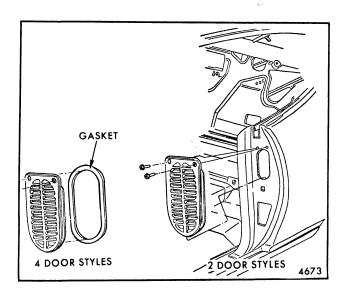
Pressure Relief Valve - "A-B-C-E-X" Styles
